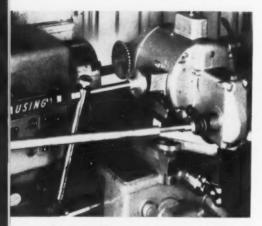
This versatile Fen-Thread-Miller is a compact and portable unit which can be quickly attached to any lathe for accurately threading all types of plastics and metals.
